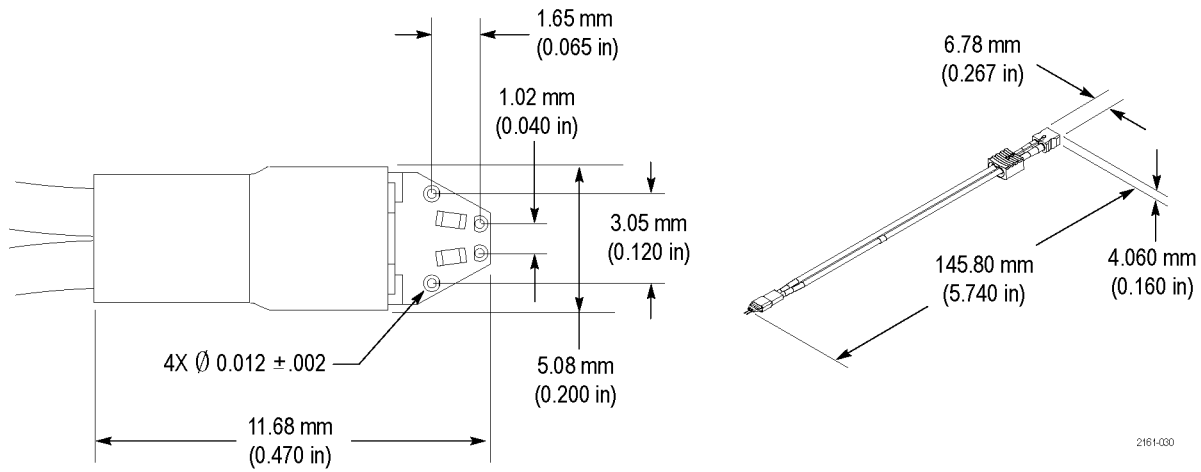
P75TLRST TriMode Long Reach Solder Tip dimensions
